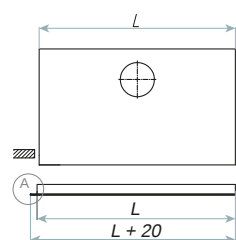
Dimensions of the boxes for inline mounting - SK outermost element.
